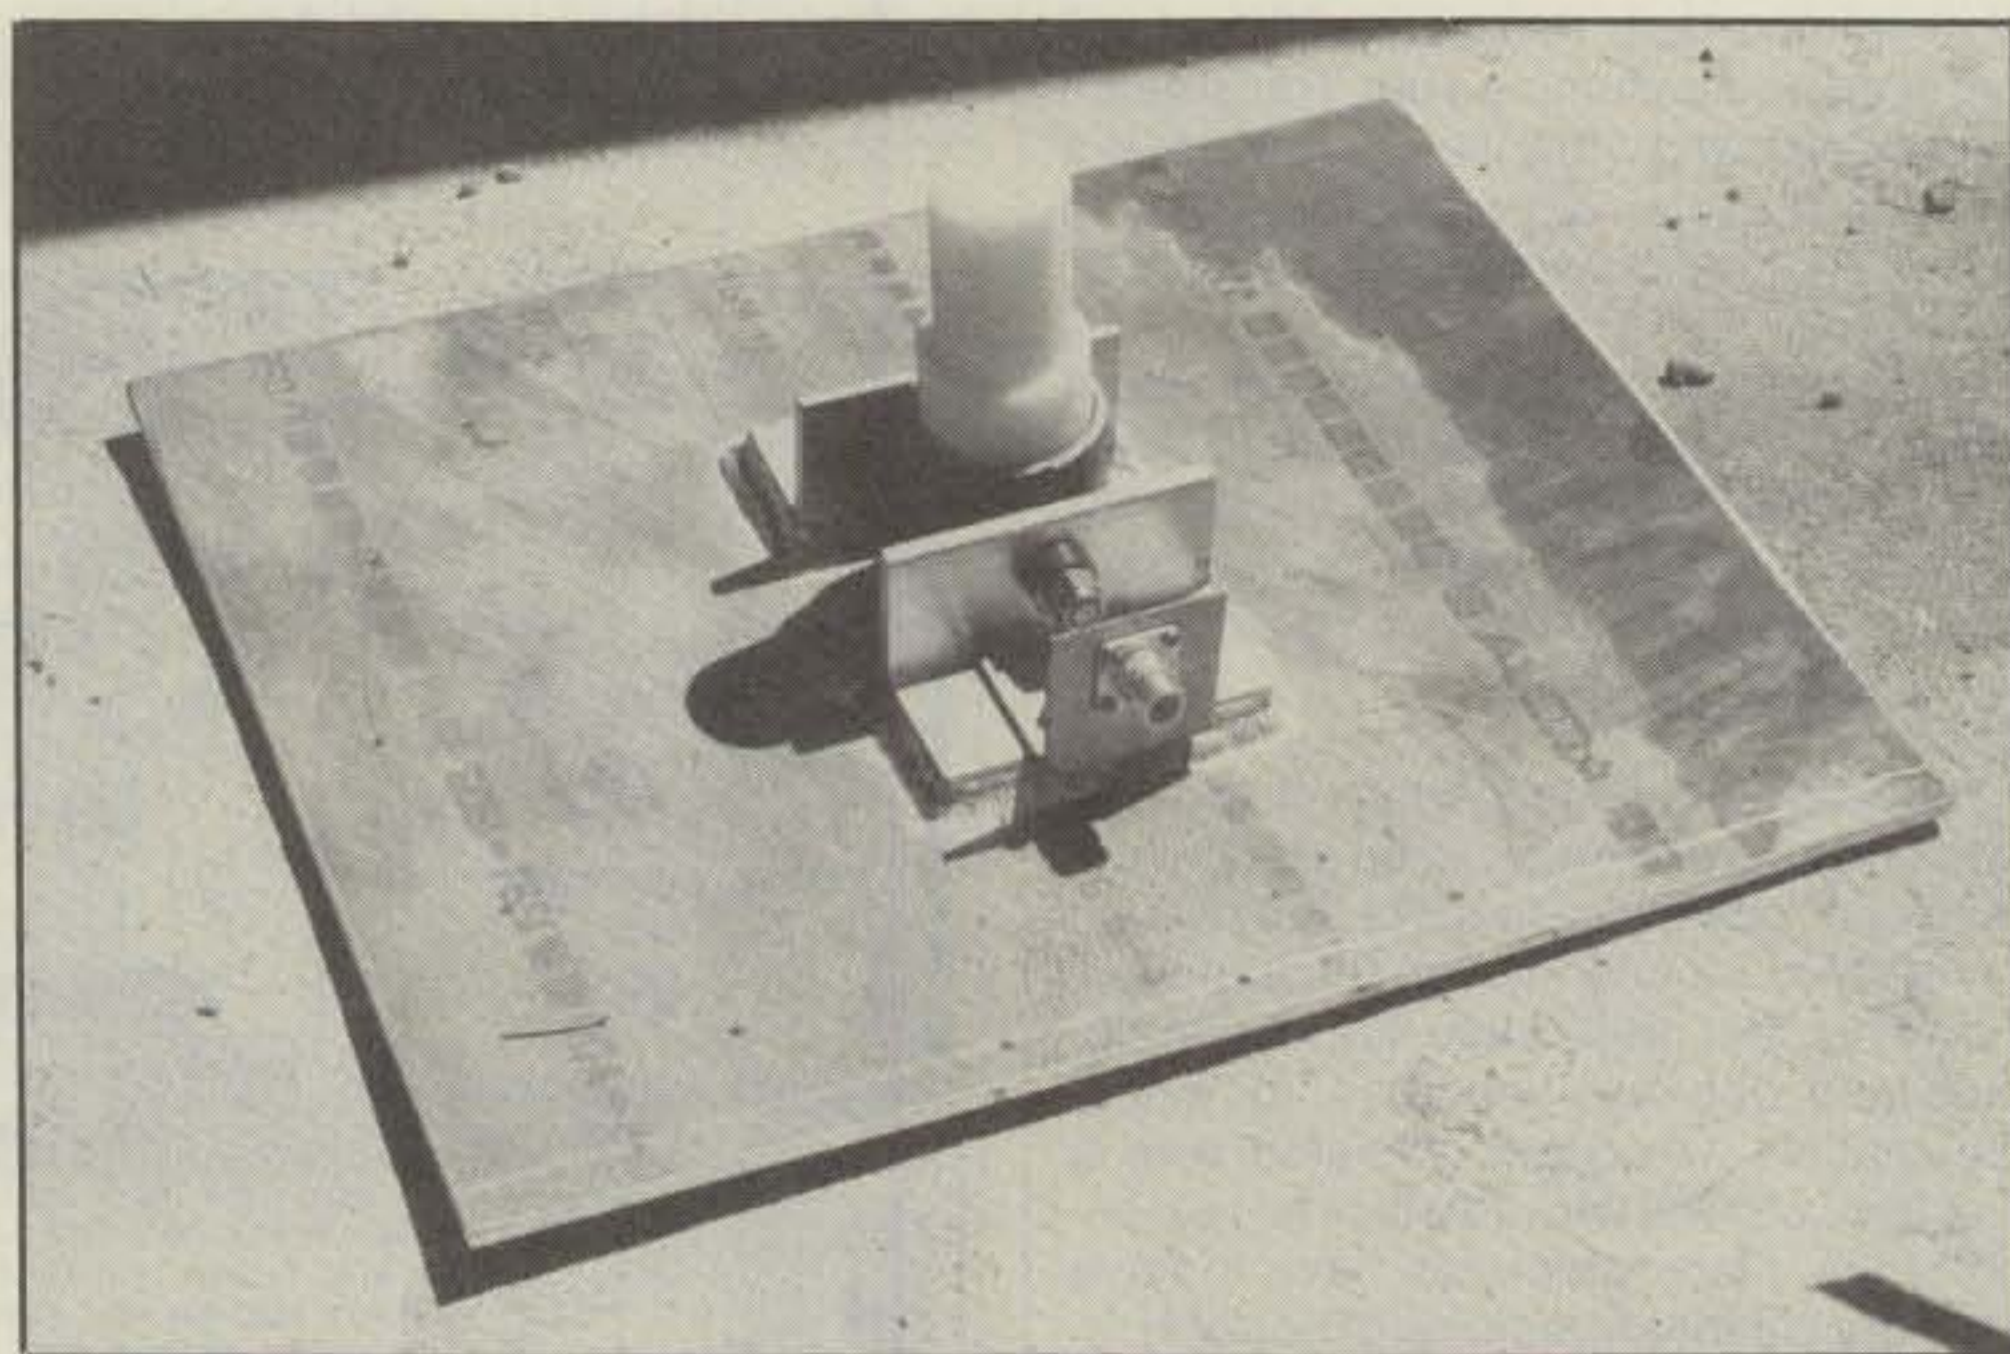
The base-plate assembly. The plate is made from 1/2 inch thick aluminum. The hinge assembly is heliarced to the plate. The base insulator is made from a length of nylon stock.
